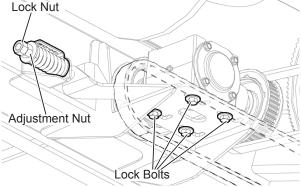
Left Draper Drive Belt 2 Tension Adjustment
